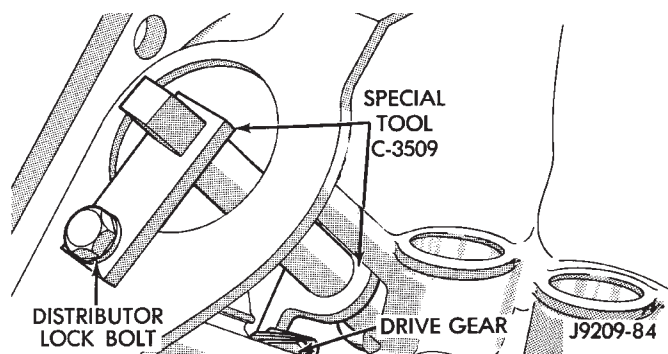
Camshaft Holding Tool C-3509 (Installed Position)
